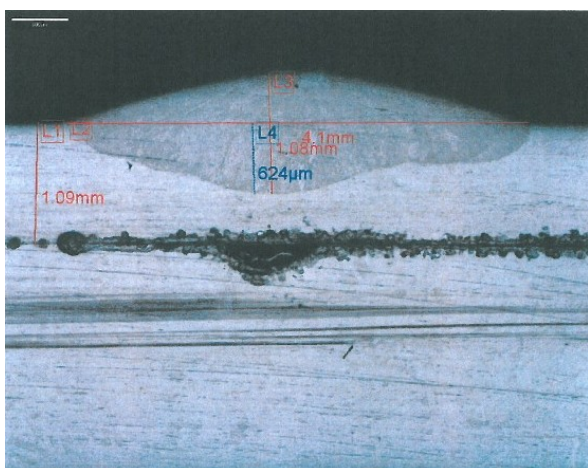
The microstructure of the insulated channel weld test specimen welded by a TIG seal spot welder.
